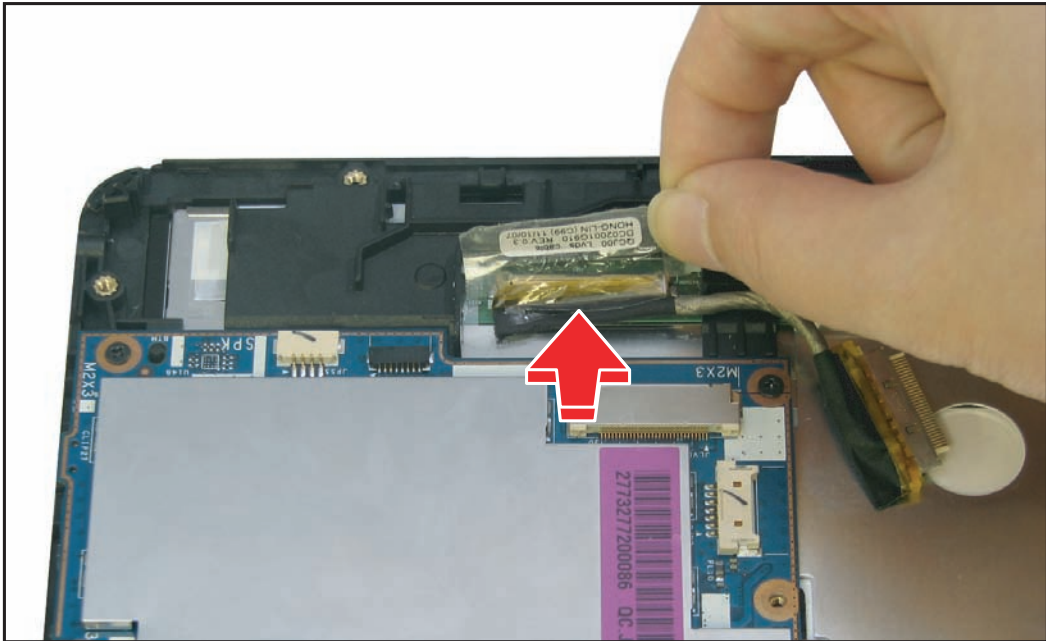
58. Connecting the LVDS Cable (1 of 2)
